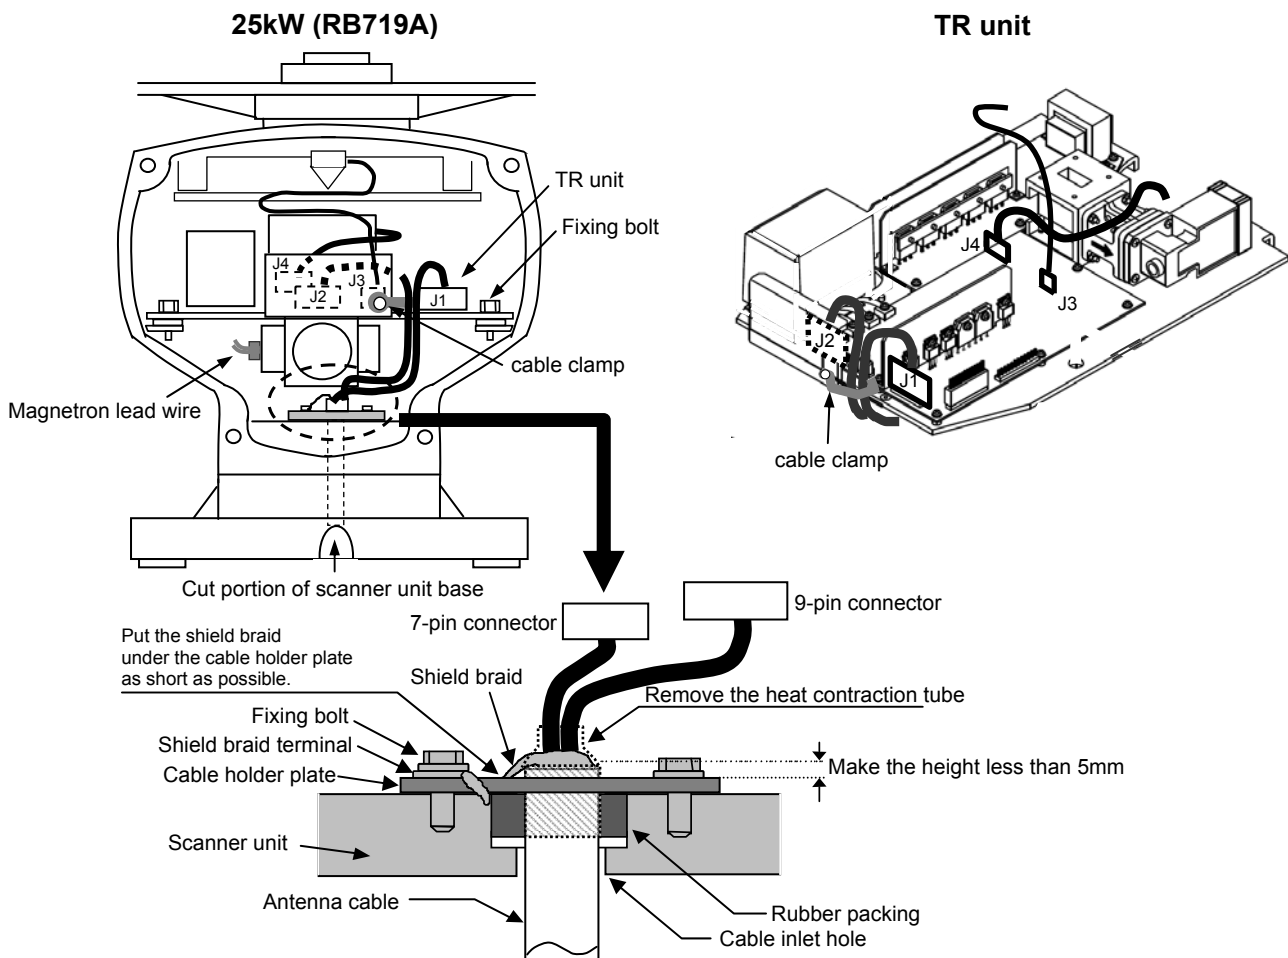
Connection of cable to Scanner Unit (RB719A)
